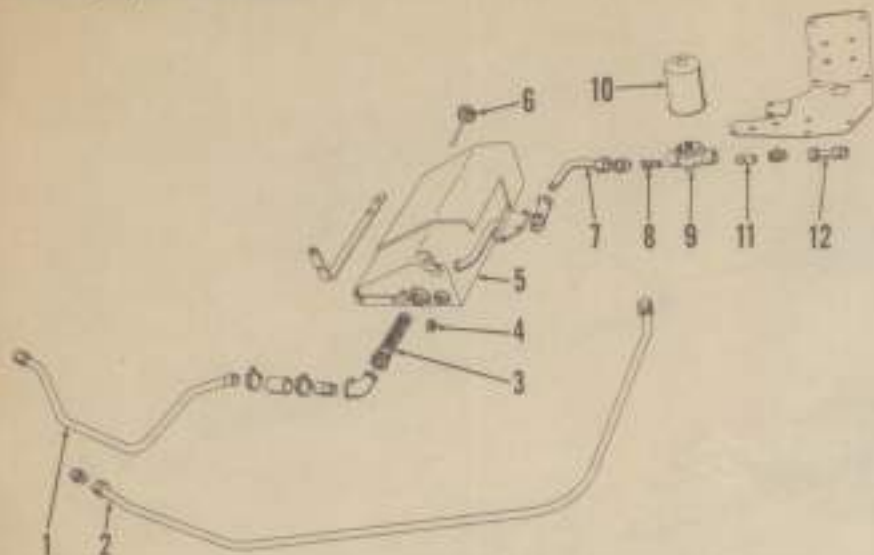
Exploded view of reservoir, filter and oil lines used with high volume pump on D-15 tractors.
